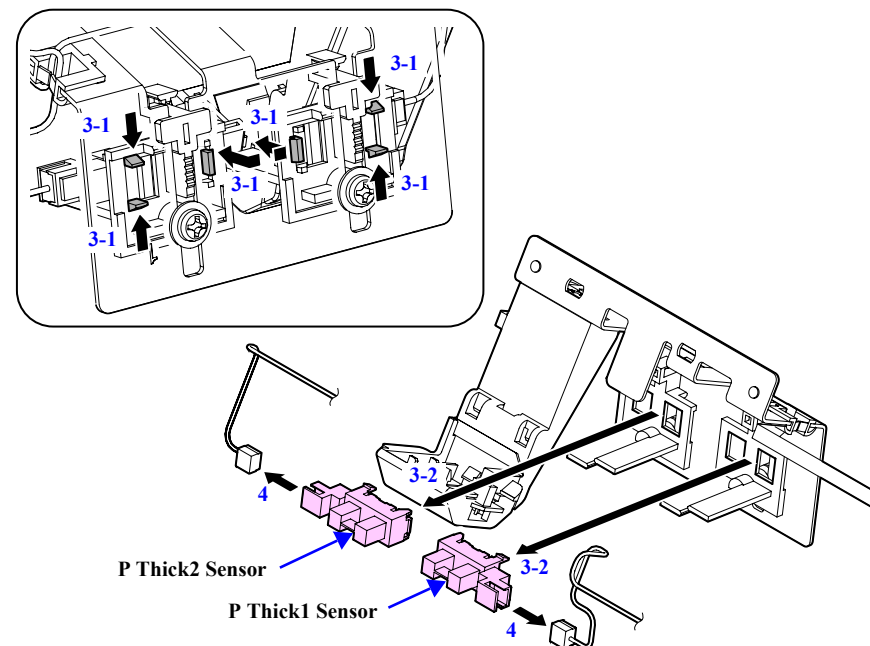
Removing the P Thick1 Sensor and P Thick2 Sensor
